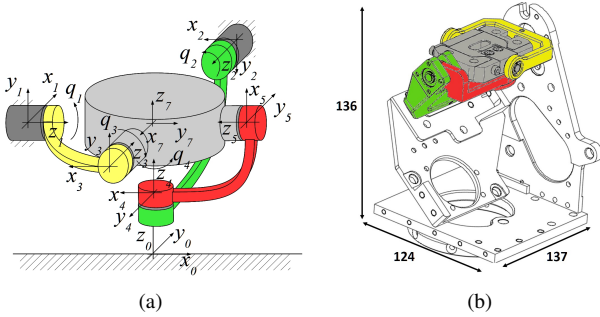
Kinematic scheme and CAD drawing of the parallel 2DoFs mechanism. All dimensions are in mm.
